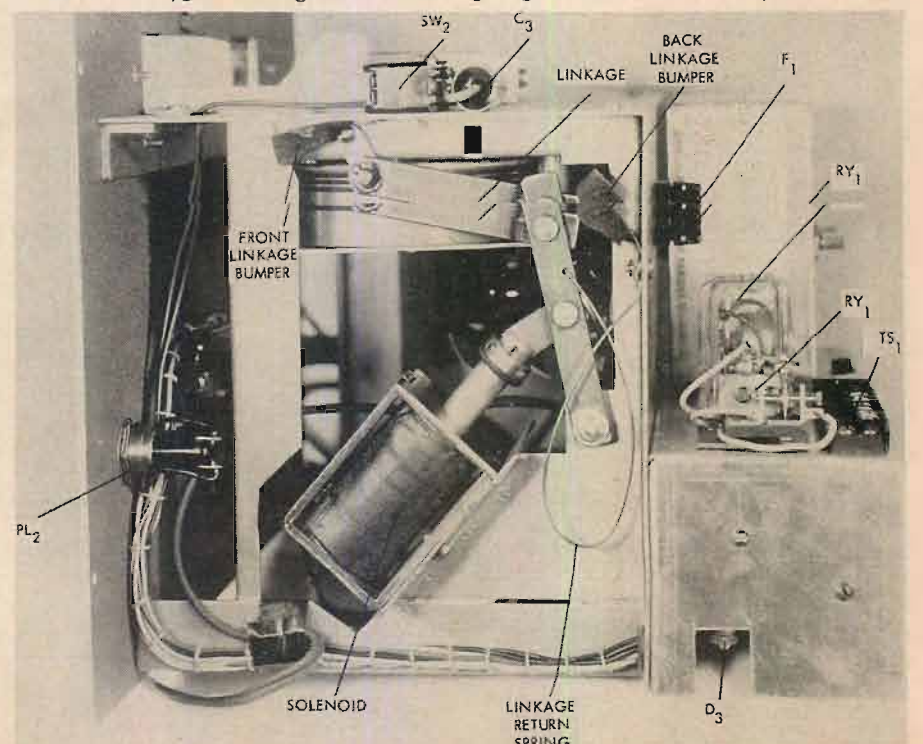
Another view of the playback deck showing the linkage in an open condition. The shape and placement of the front and rear linkage bumpers can be seen here.
